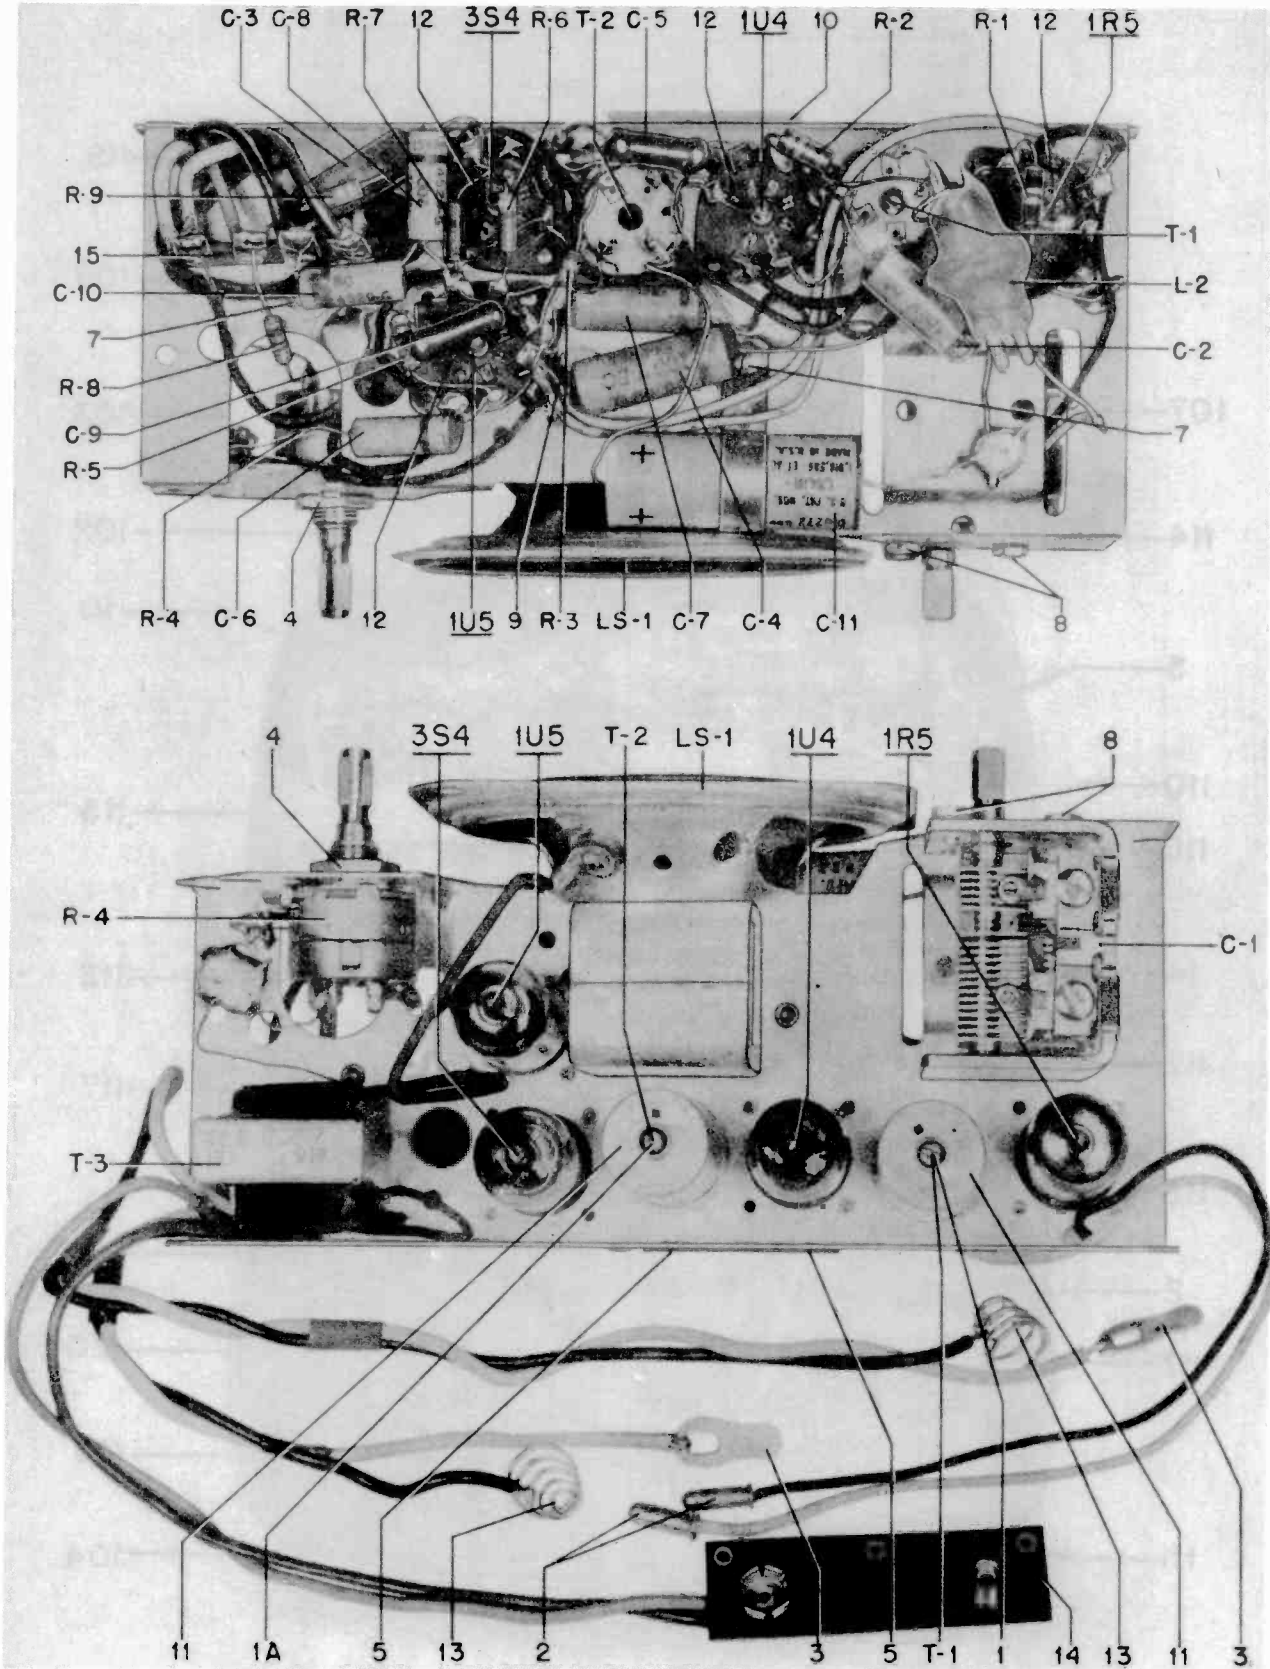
PARTS LOCATION - CHASSIS TOP & BOTTOM
